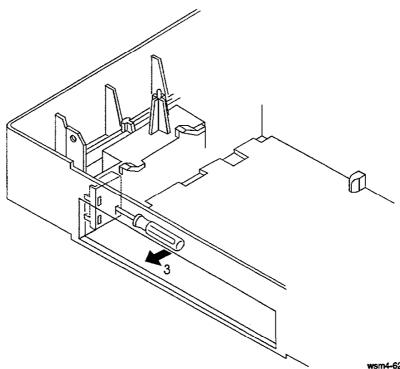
Removing the Tray 3 Paper Size Sensor
